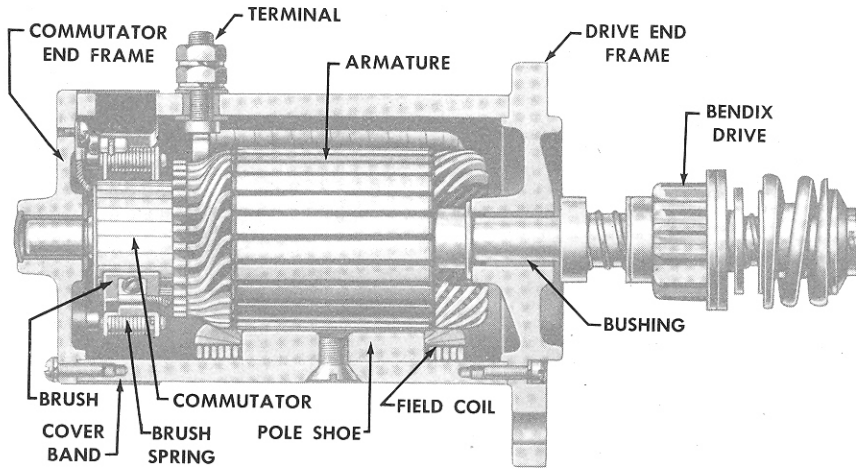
Sectional view of a cranking motor using a compressing-spring type inboard Bendix drive.
